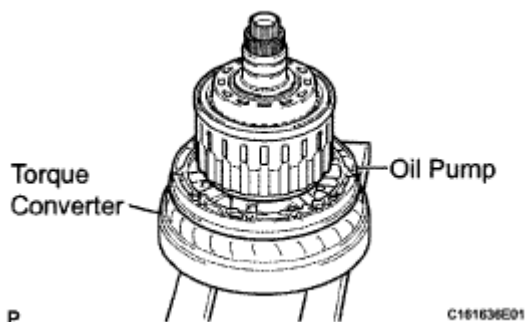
Identifying Clutch Drum And Input Shaft Assembly Onto Oil Pump
